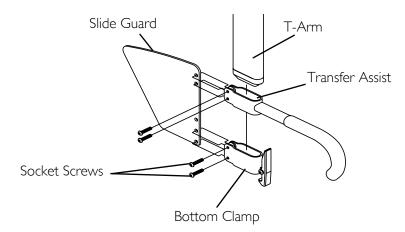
Adjusting T-Arm Transfer Assists and/or Side Guards
